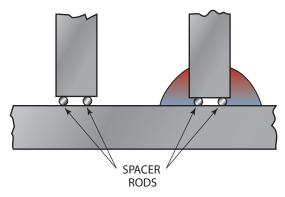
Base plate cracking can be controlled by placing spacers in the joint before welding.
